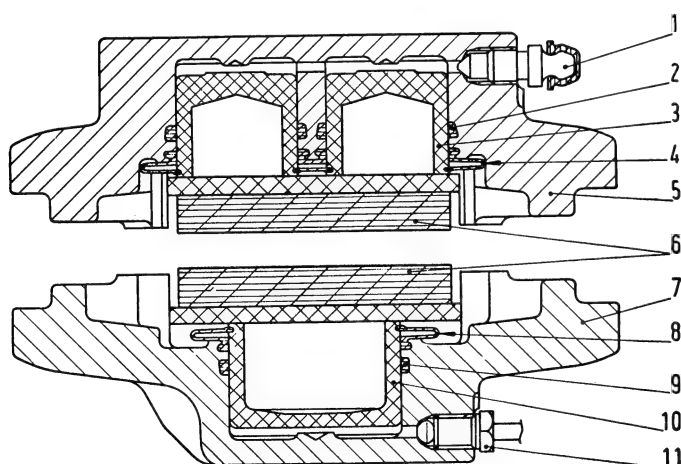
Side and section view of the right caliper for 1500 Cabriolet front wheel disc brake.
